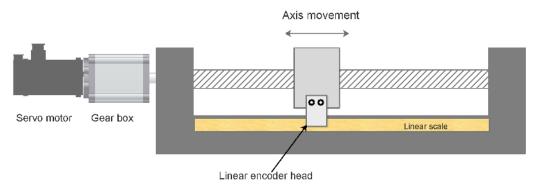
Rotary Motor with Gear and Ball Screw and Linear Encoder on Load
